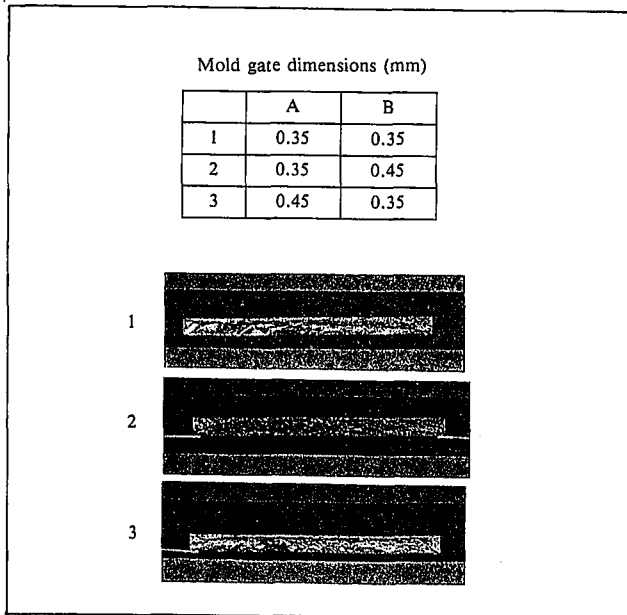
Effect of gate geometry and size on LSI chip movement in mold cavity during transfer molding
